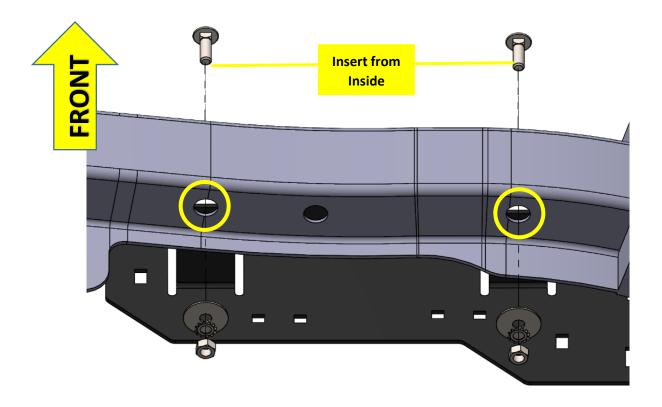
TUNDRA-301 Mounting to Crossmember with Hardware; Exploded View
